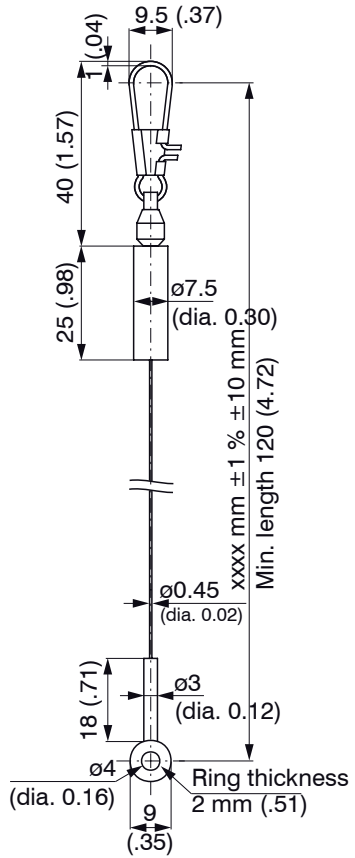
Wire extension WE-xxxx-CLIP, dimensions in mm (inches), not to scale
